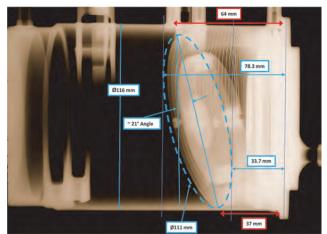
Measurements made using the X-ray of the Accumulator Assembly
